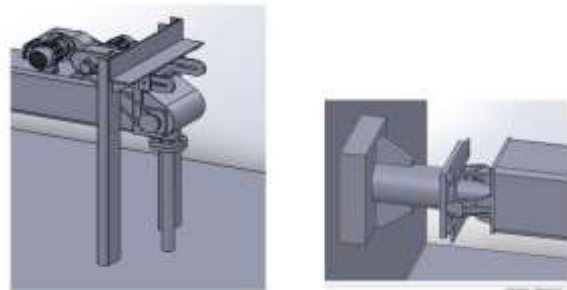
CAD model of LRSB Drive mechanism and LRSB guide mechanism
